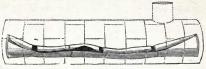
Explosion of a Cornish boiler from collapse of the furnace-tube from weakness, due to wear and tear.
